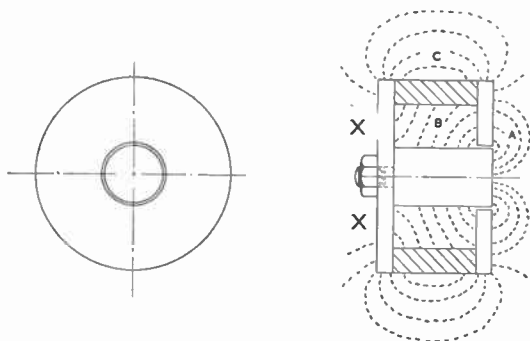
A typical loudspeaker permanent magnet assembly using a ring type magnet.
